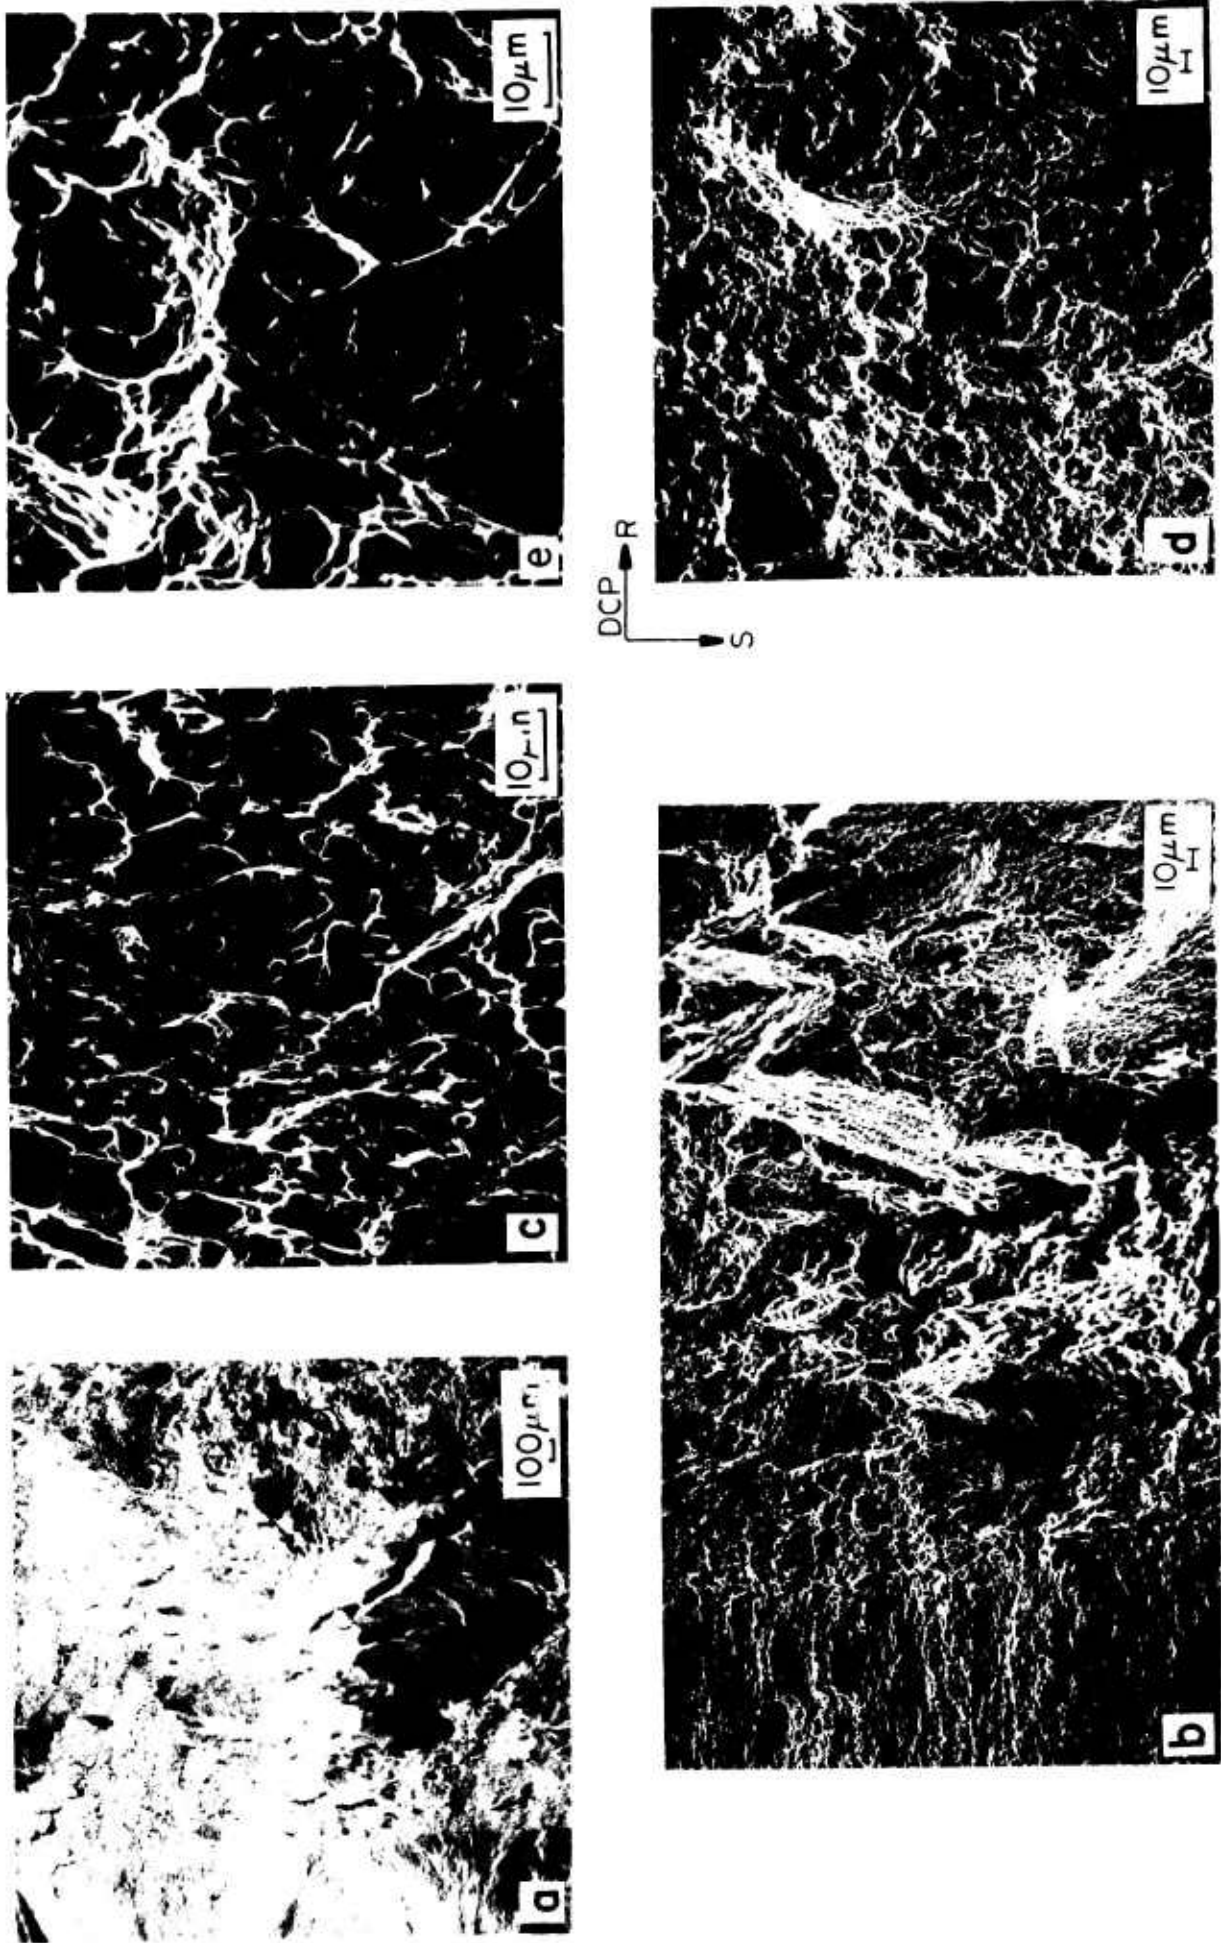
Alloy 227, sample 7LRC2. SEM of fracture surface (a) X25, (b) X250 - precrack/ fast fracture transition, (c) X900 - fast fracture close to transition, (d) X250, (e) X1000 - fast fracture.
